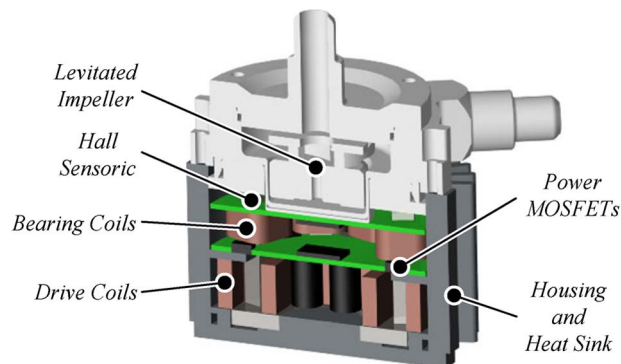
Sectional view of a bearingless pump system with fully integrated power electronics.
